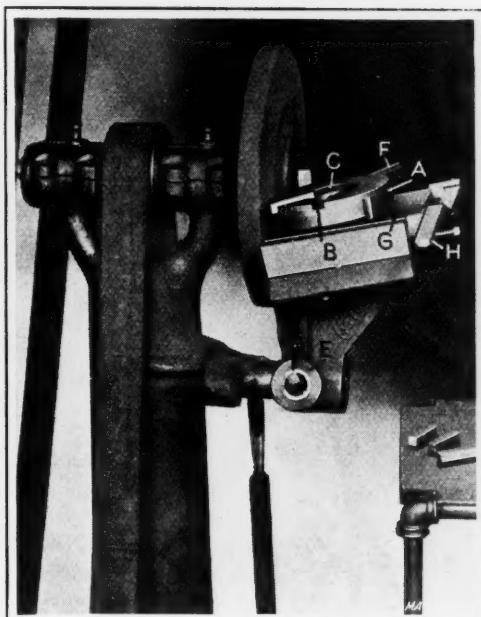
Disk Grinder with Swiveling Attachment for grinding End of Chasers
